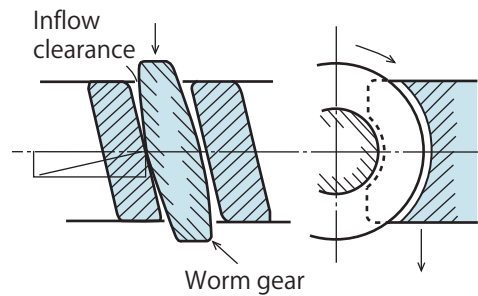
Line of contact for Worm gear pair (2 number of threads) and Tooth bearing for standard Worm gear. Quoted literature is the same as Fig. 6-4.
